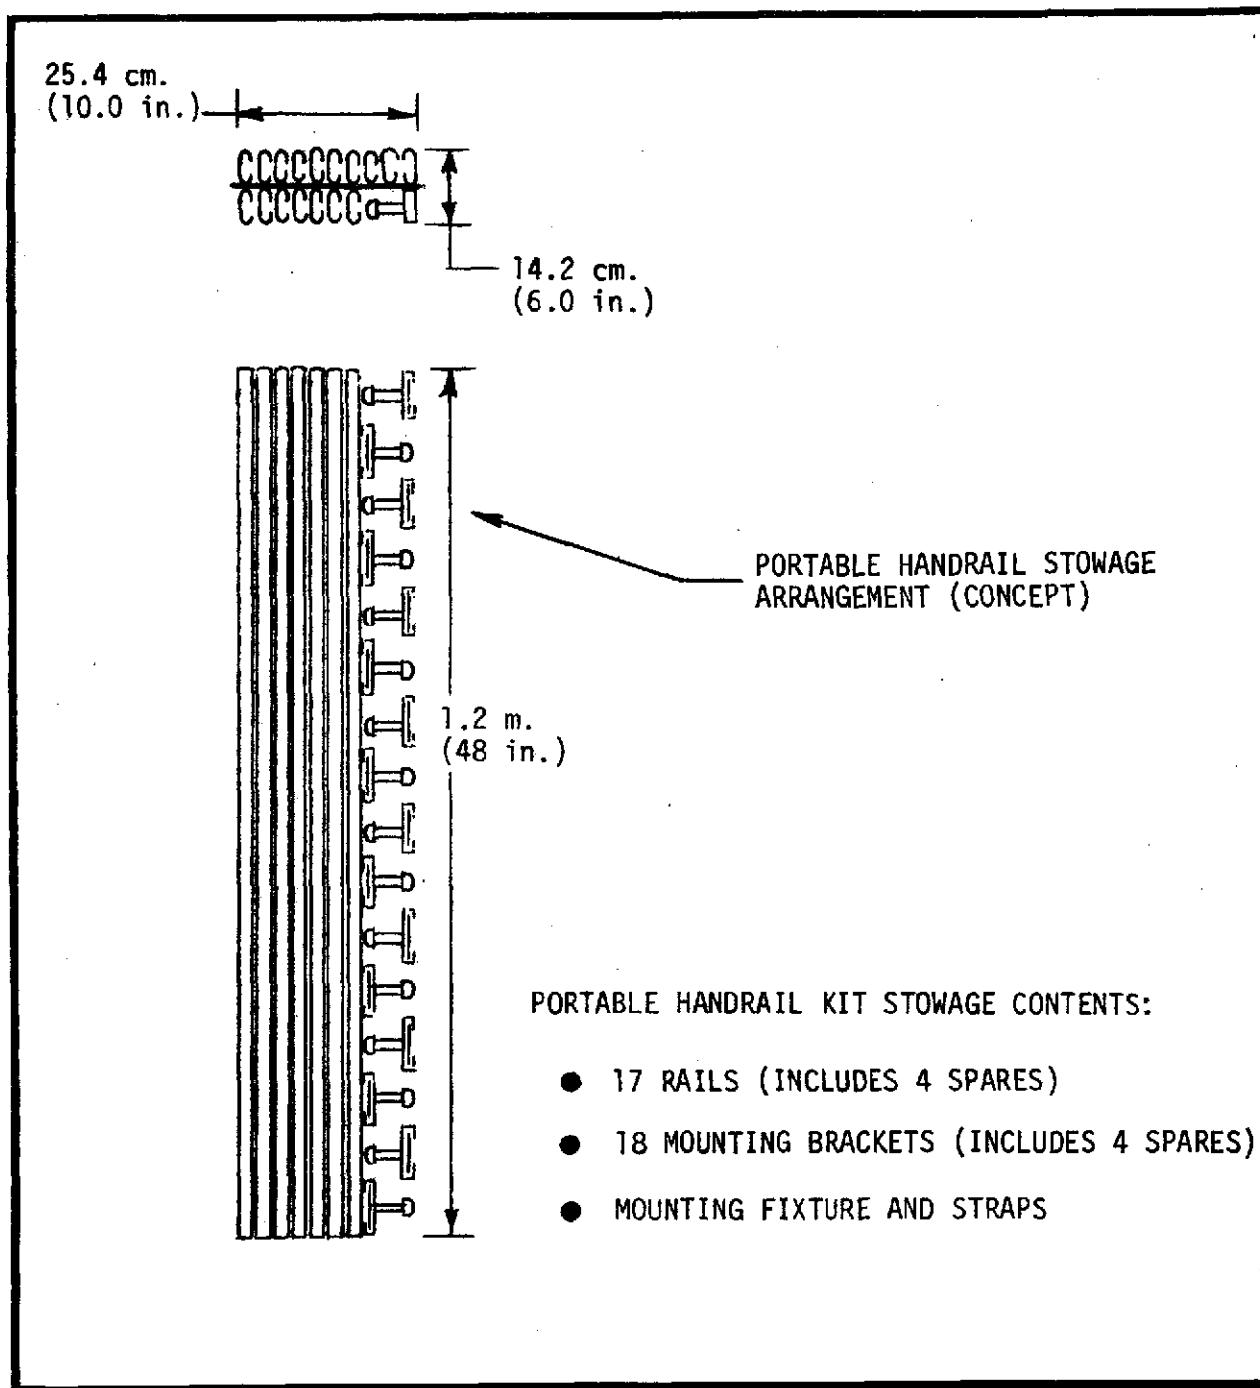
Portable Handrail Kit Stowage Envelope
